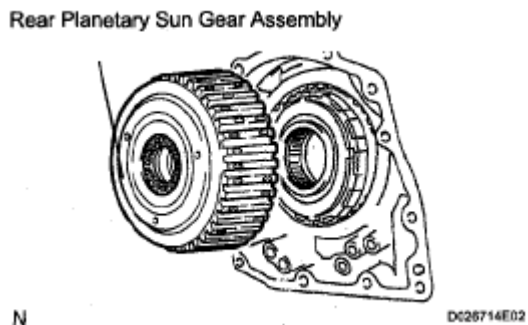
Identifying Rear Planetary Sun Gear Assembly
